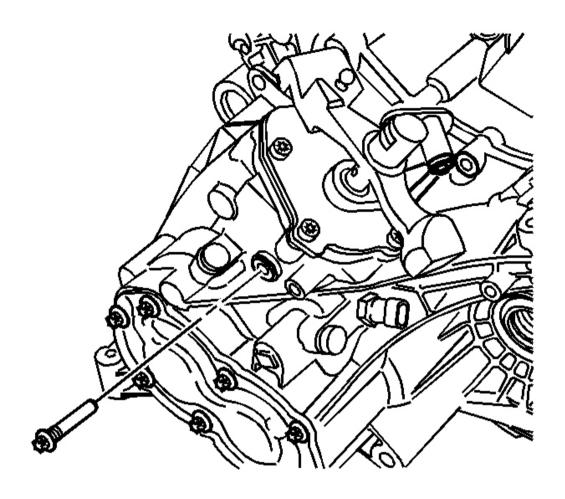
View Of Shifter Guide Bolt Courtesy of GENERAL MOTORS CORP.
